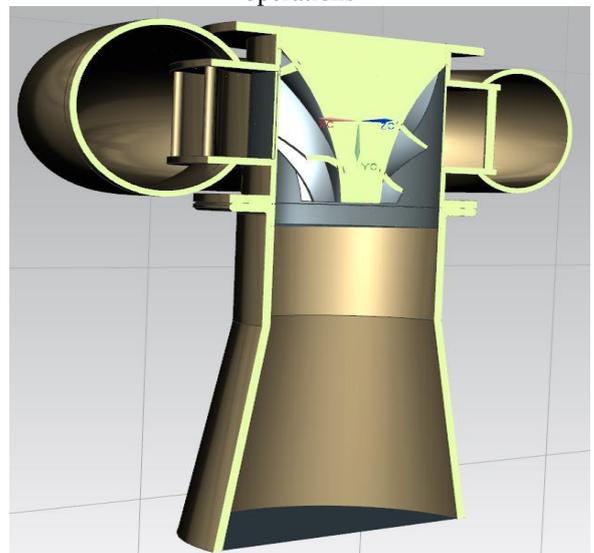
Assembled NX CAD models (section viewing), spiral casing, impeller and diffuser
